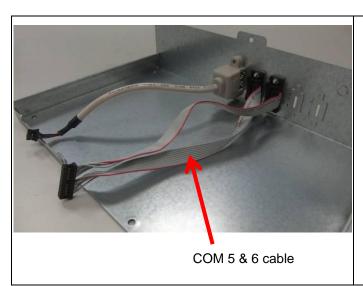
Knock off two DB-9 opening and screw RS-232 connectors on chassis.
